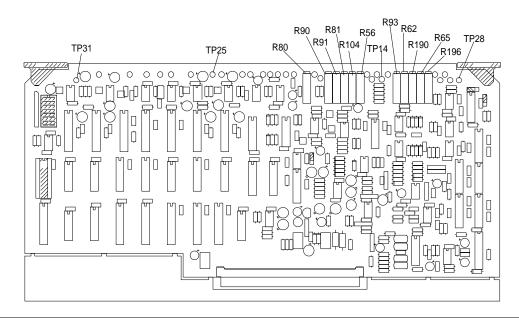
Adjustments and Test Points, A24 ALC/Frequency Instruction PCB (54154A thru 54177A)
